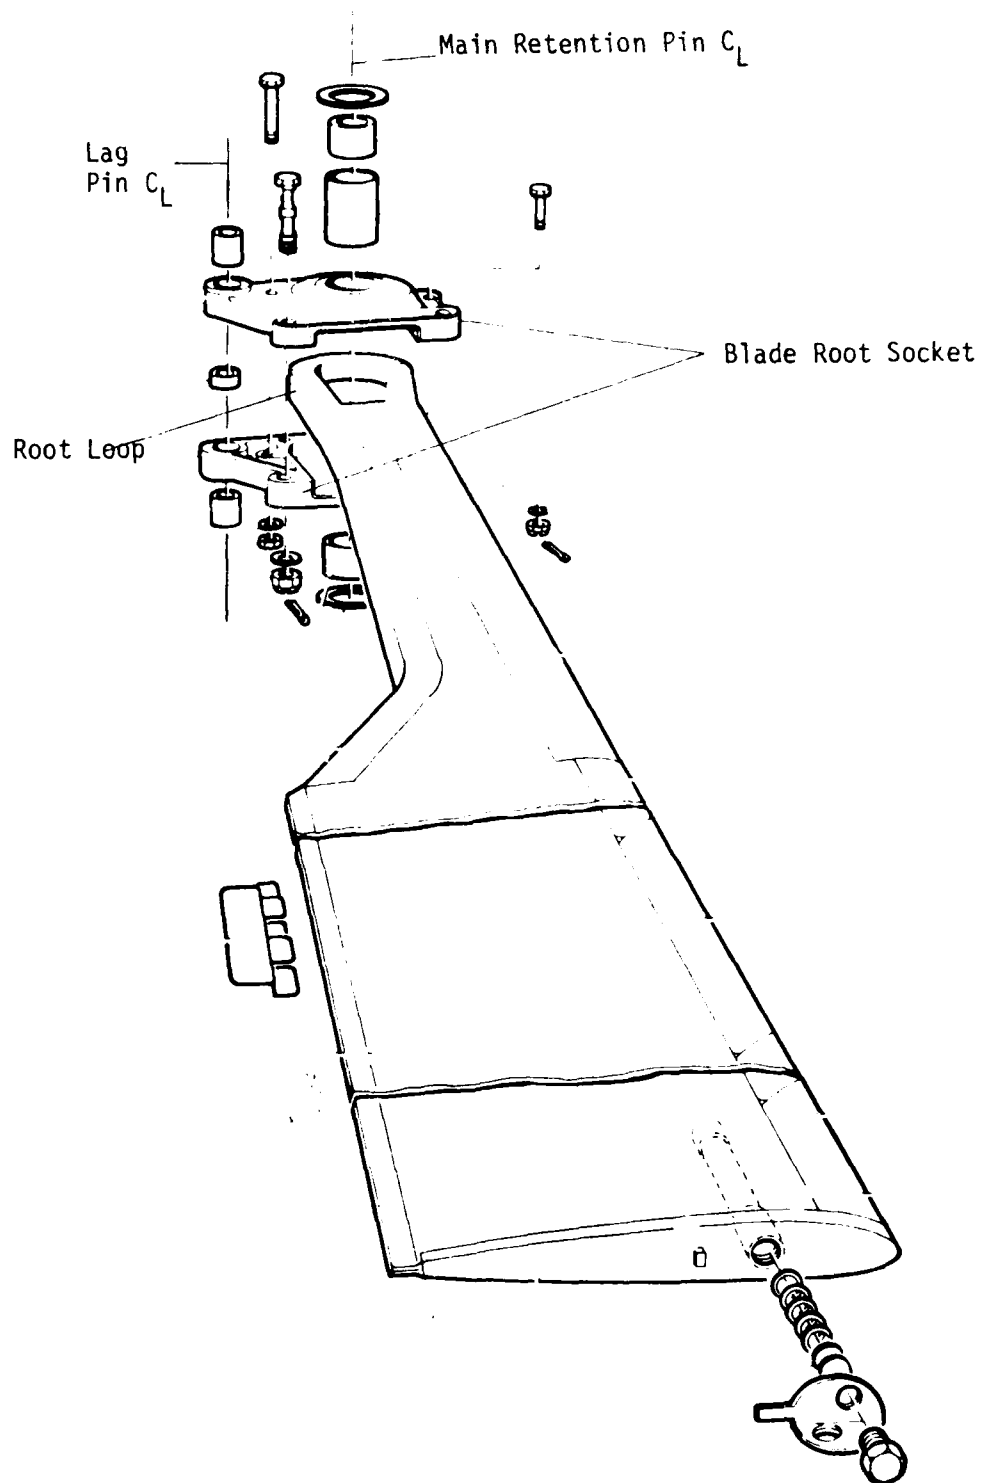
BO-105 MAIN ROTOR BLADE ASSEMBLY.
